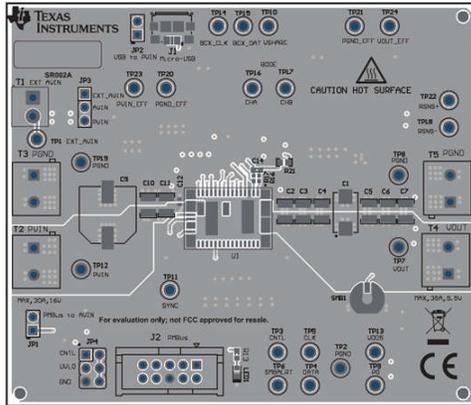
TPSM8S6C24SEVM-1PH Top Side Component View (Top View)
